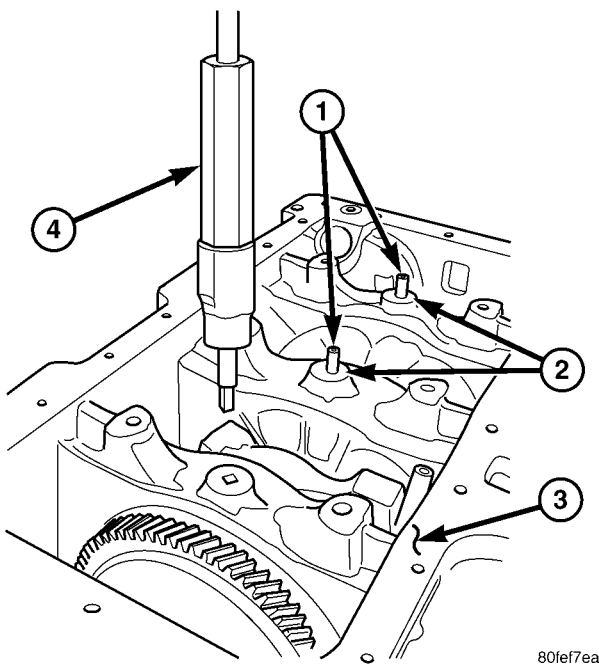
PAINT MARK CRANKSHAFT SUPPORTS
